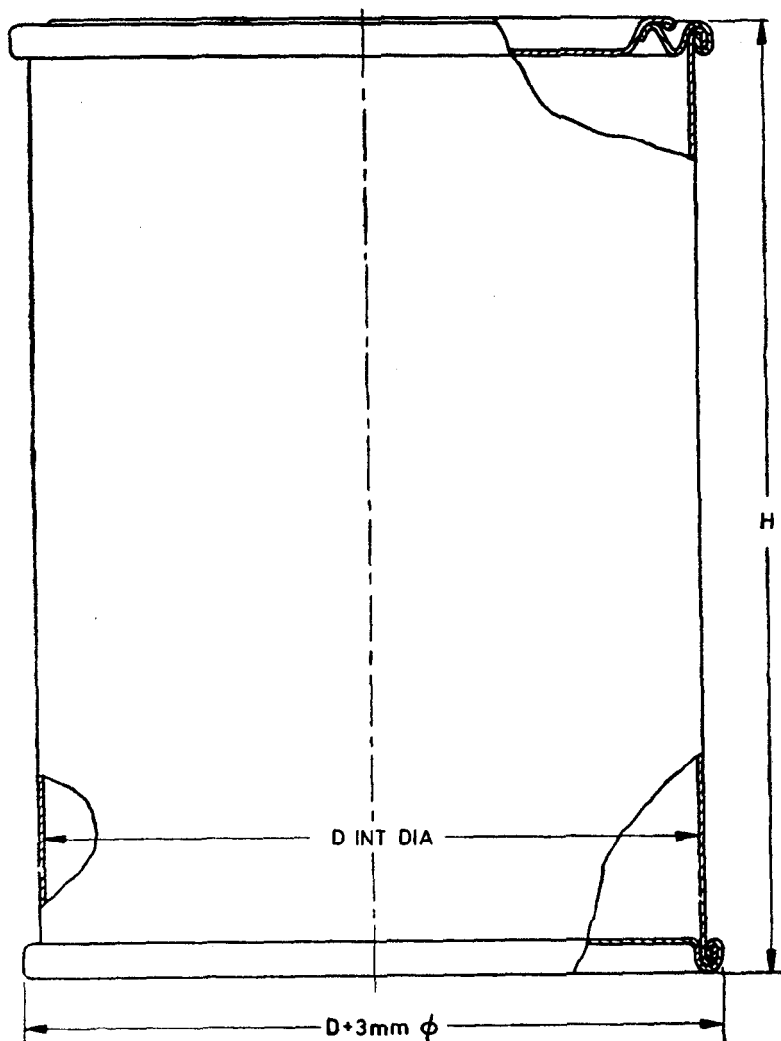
DIMENSIONS FOR ROUND GREASE TINS
